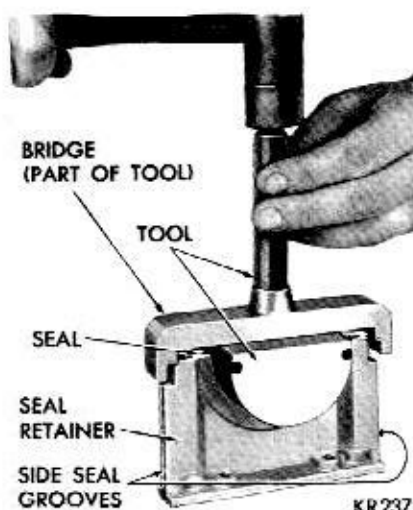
Installing Rear Main Bearing Lower Oil Seal
